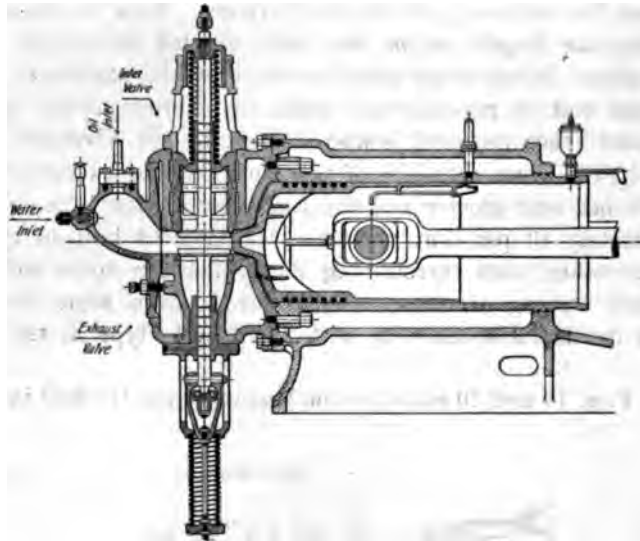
CROSS-SECTION OF RUSTON PROCTOR OIL ENGINE
